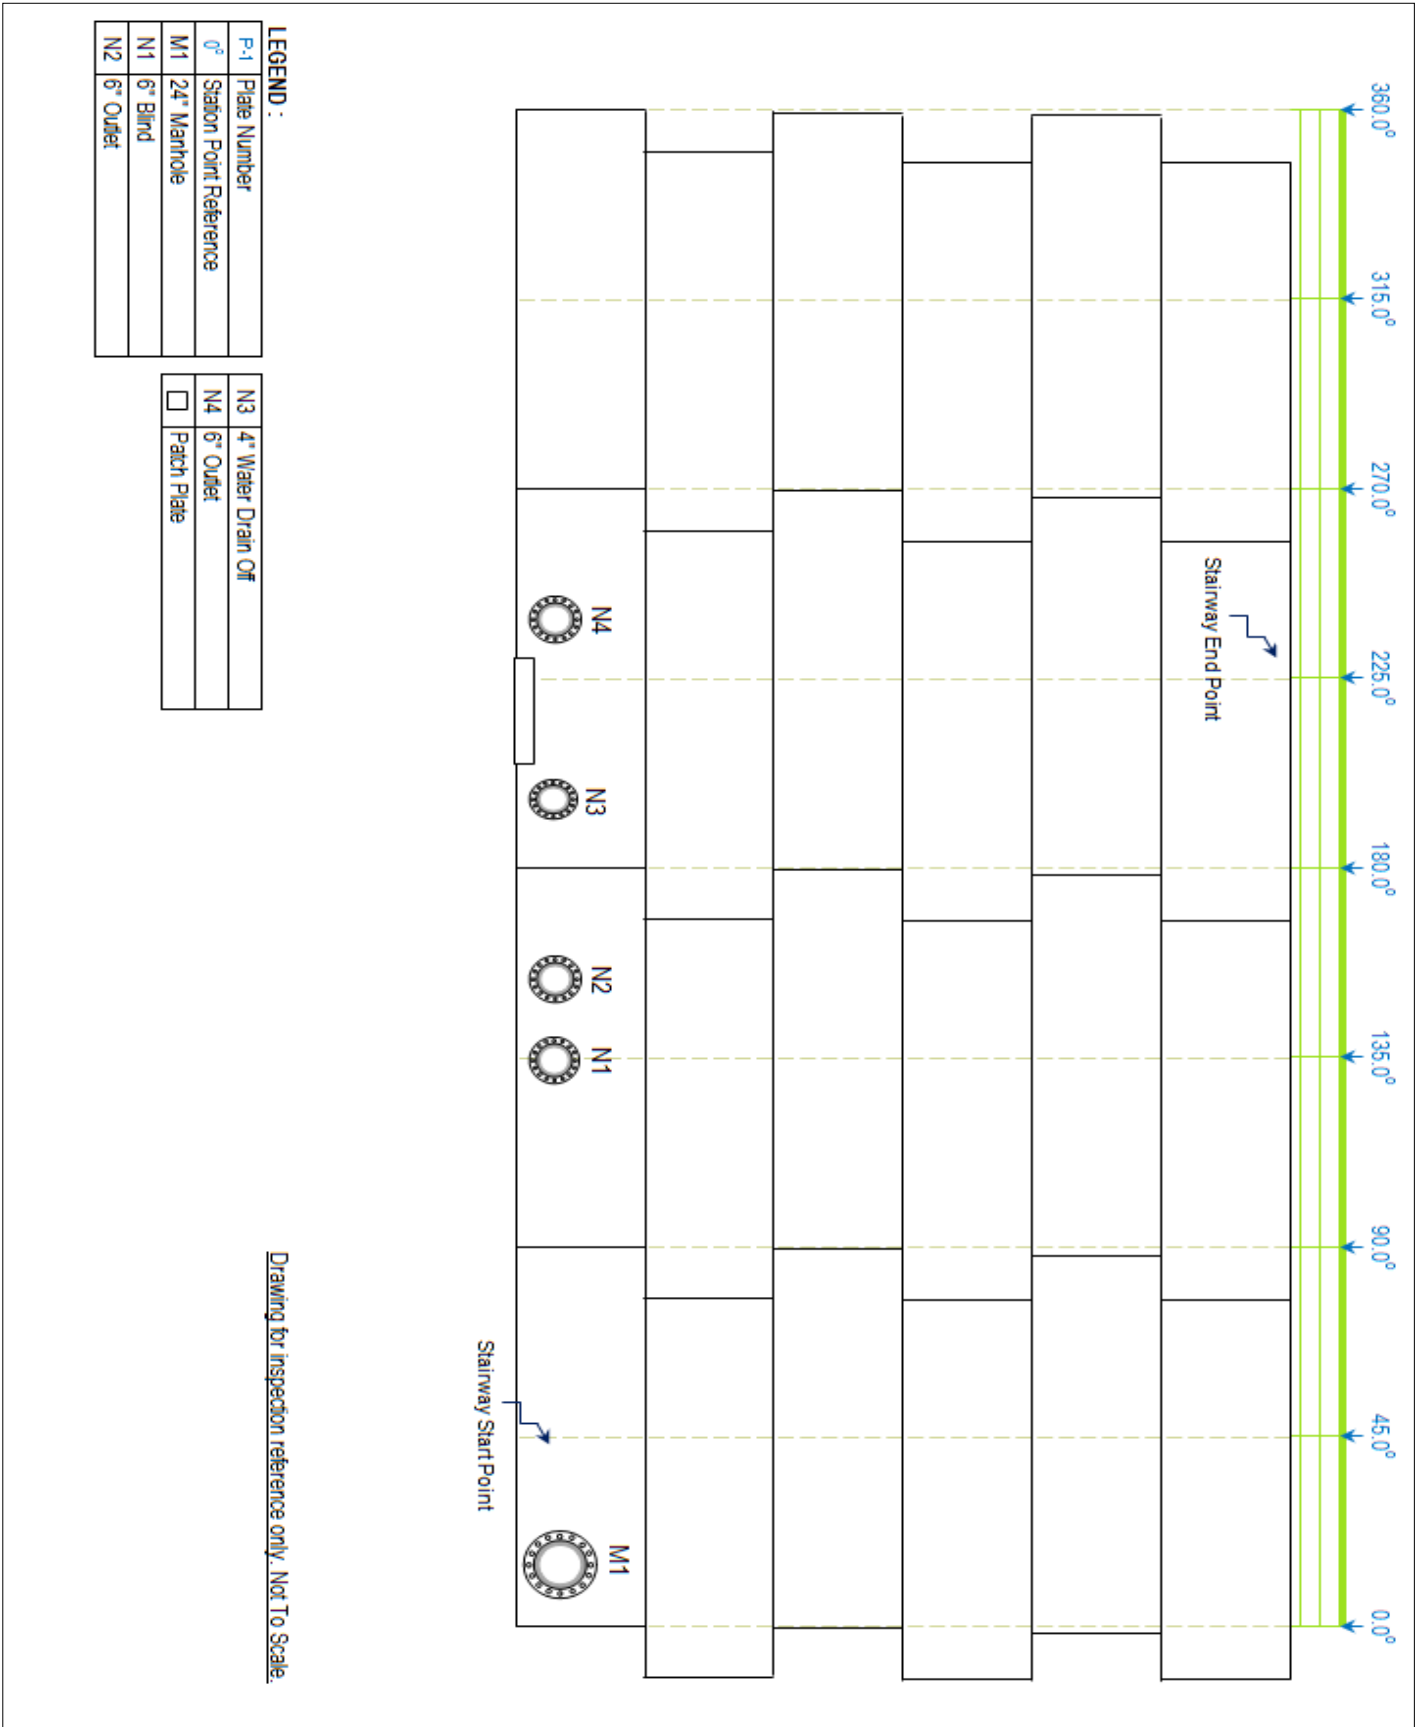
Tank Shell Plate and Nozzle Layout
